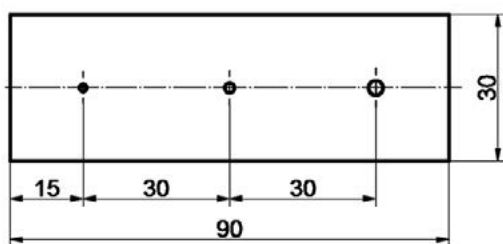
Shape and dimensions of AlMg5 aluminium alloy plates with openings tested using the dye-penetrant method. Thickness of material: 4 mm
